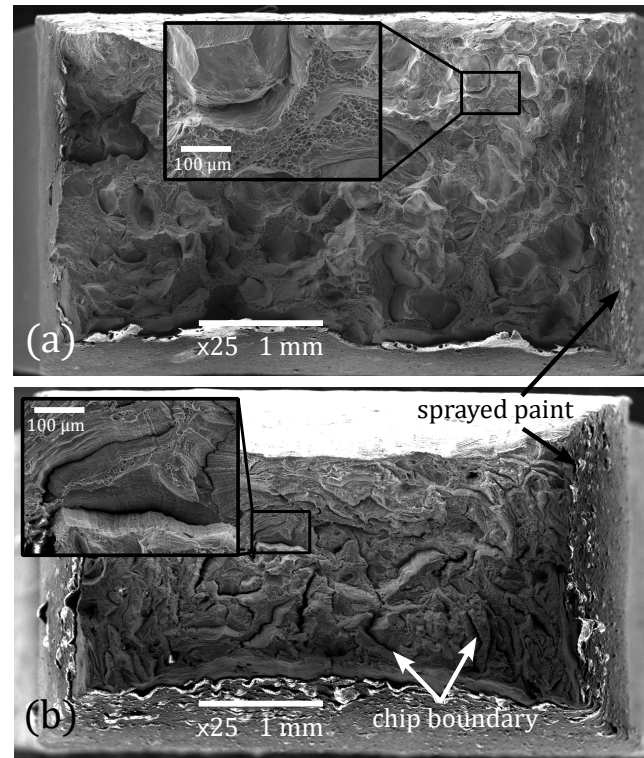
Typical fracture surfaces of the cast-based (a) and chip-based (b) tensile specimens.
